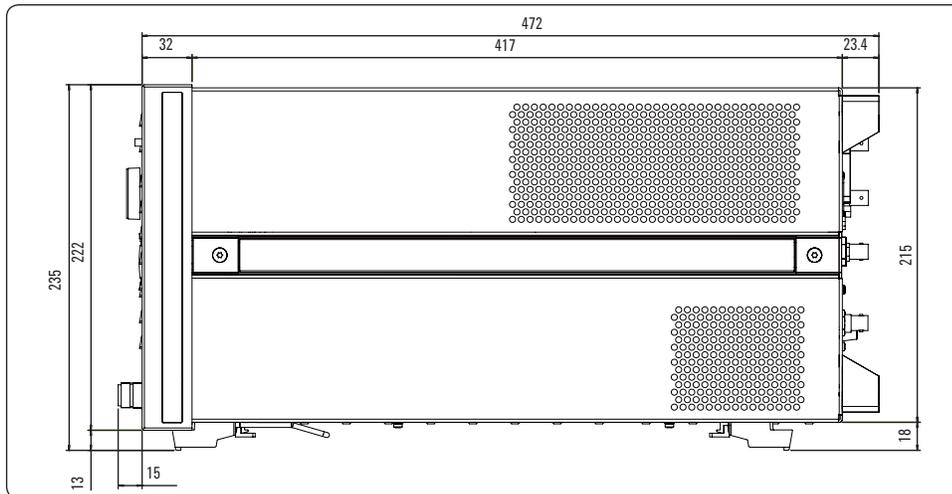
Dimensions (side view, E5071C Option 230/235/240/245/260/265/280/285/430/435/440/445/460/465/480/485, in millimeters)
